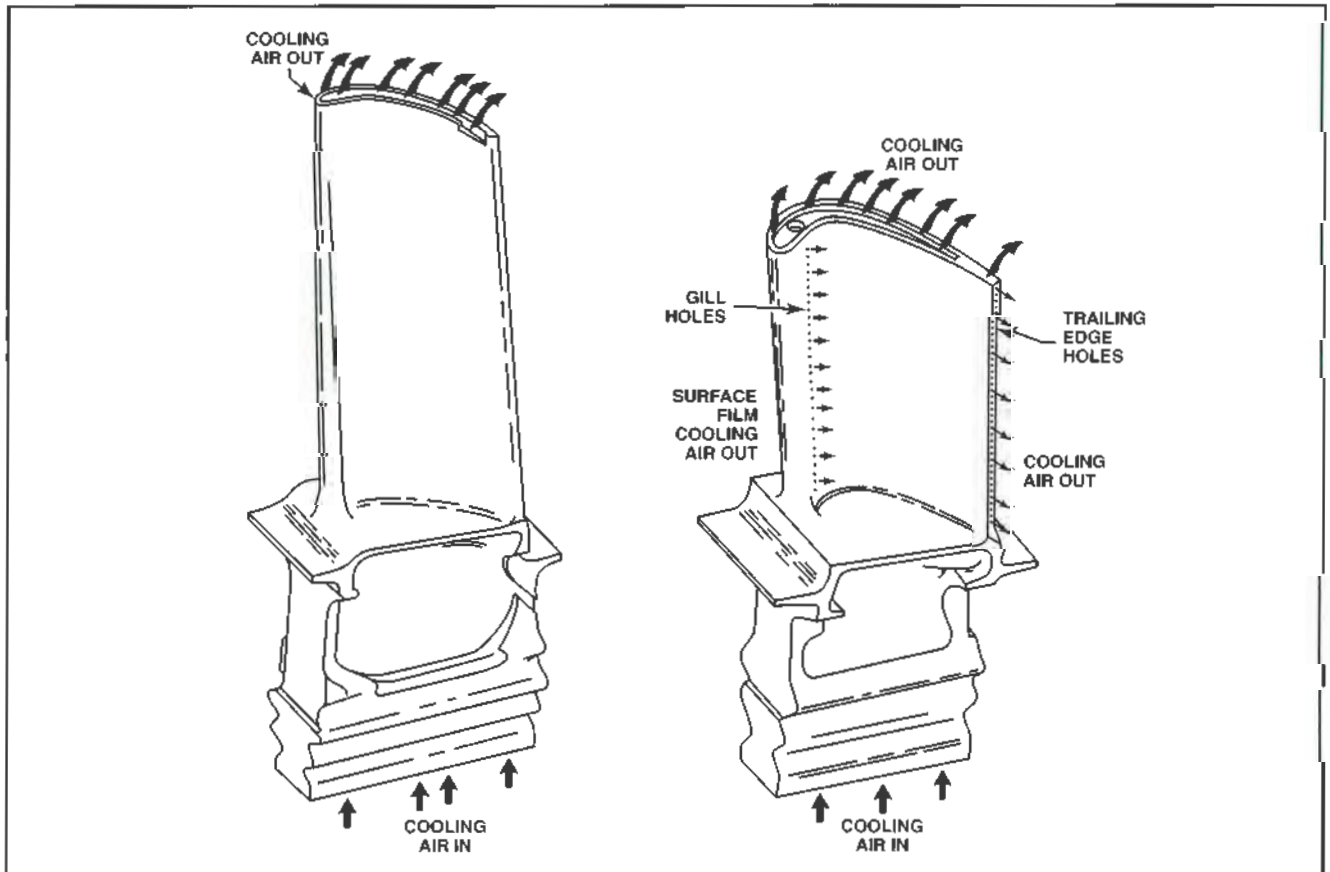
An internally cooled blade receives cooling air at the root and expels it at the tip or through holes in the leading and trailing edges.
